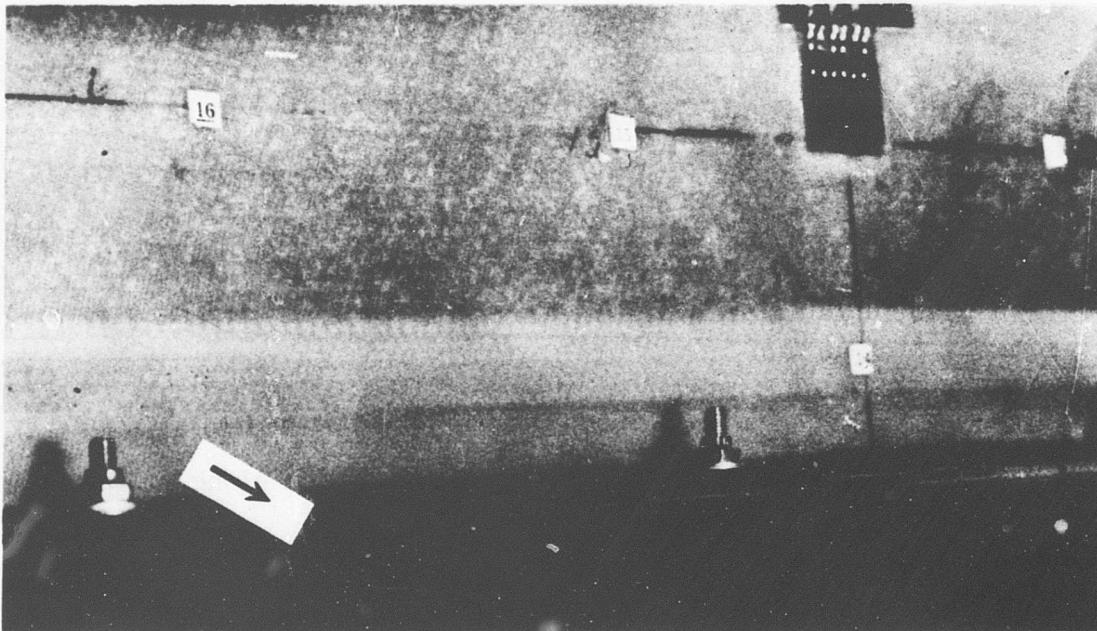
Failure Showing Movement Between Faying Surfaces of Aft Spar Flange and Lower Surface Panel of Box No. 2.
